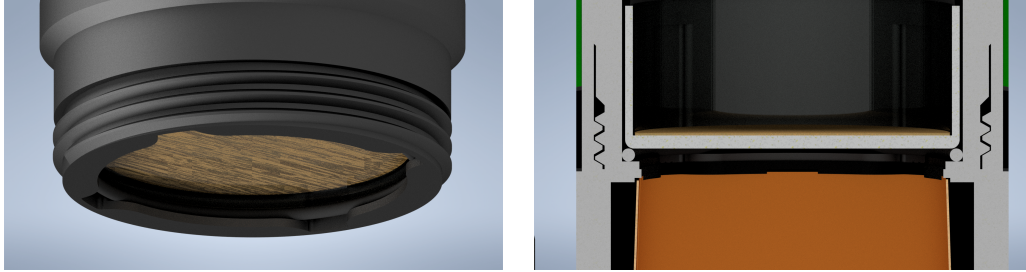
CAD rendered images of the threaded interfacing between PMT housing and LGPMT interface. The left image is a closeup of the threads located at the bottom of the 3D-printed tube. The right image is a slice through the housing to show the alignment of threading and the PMT position with respect to the protective O-ring and light guide (orange).
